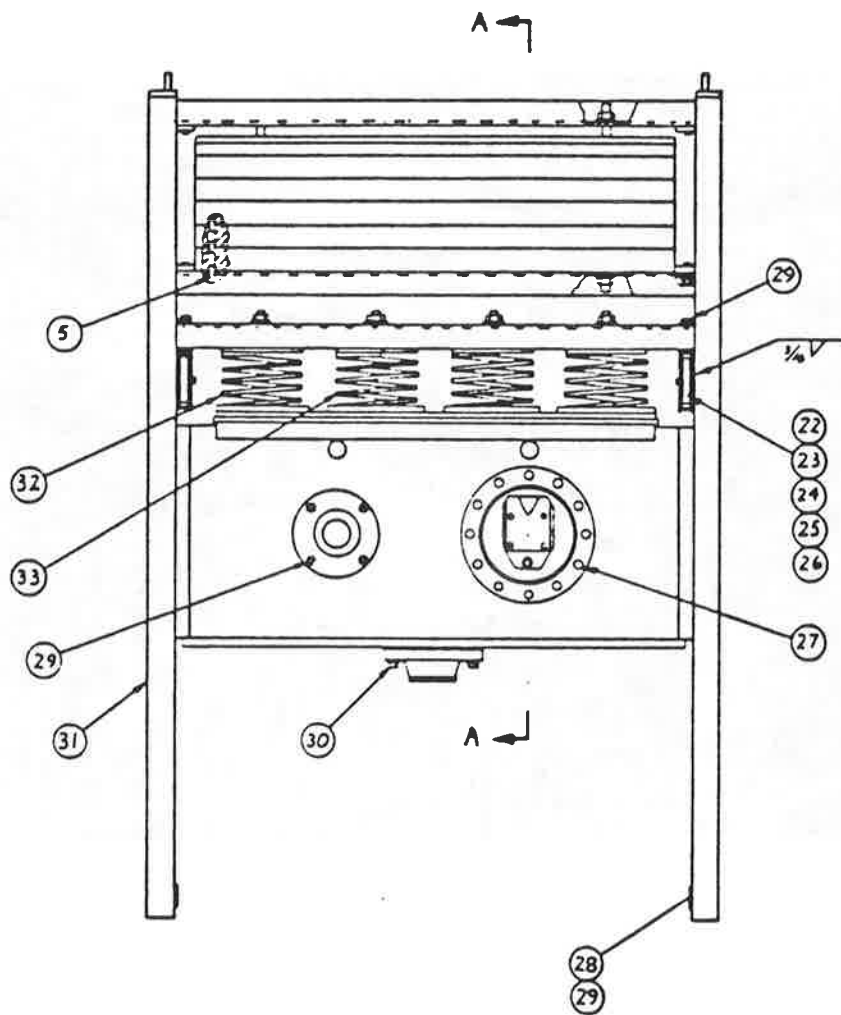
Detail of Vibro-Driver: Overall Elevation
